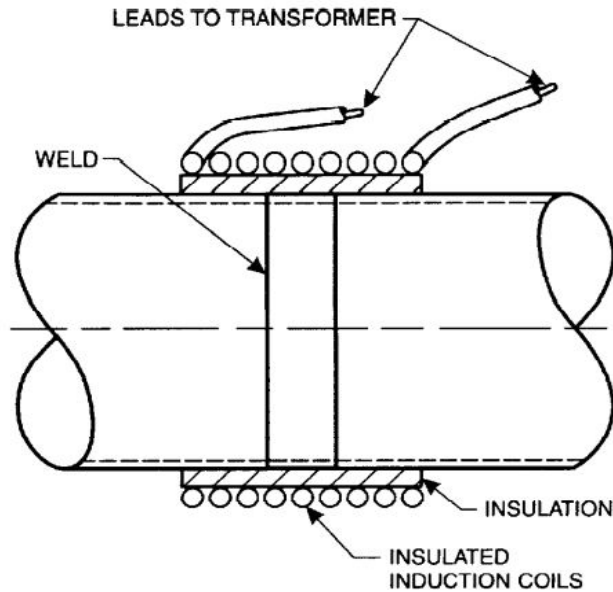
Schematic depiction of induction coil setup on a pipe weld [43]
